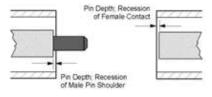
Proper pin depth is necessary for ensuring measurement accuracy
